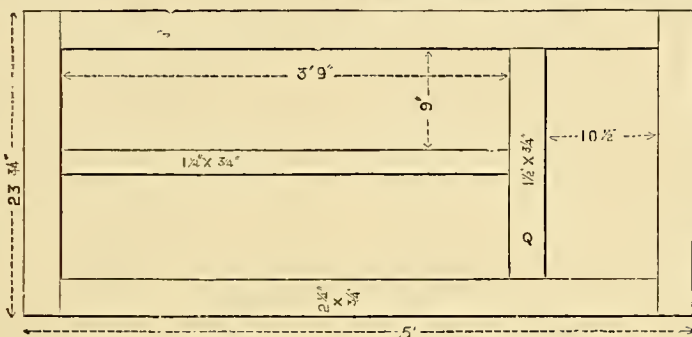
DIAGRAM SHOWING FORM AND DIMENSIONS OF FRONT FRAME.
